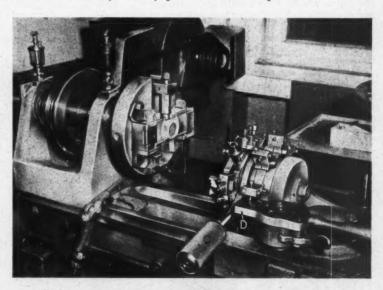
Turning, boring and facing operations on Werra camera bodies are carried out on this Zeiss RB 34 instrument lathe, on which the casting is held in a face-plate type fixture
